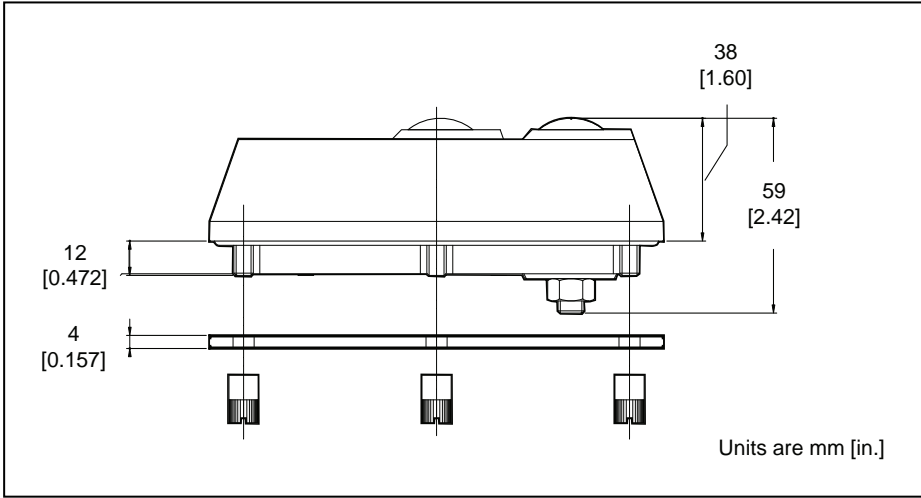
Side View of Roxtec Cable Seal Frame (units are mm [inches])
